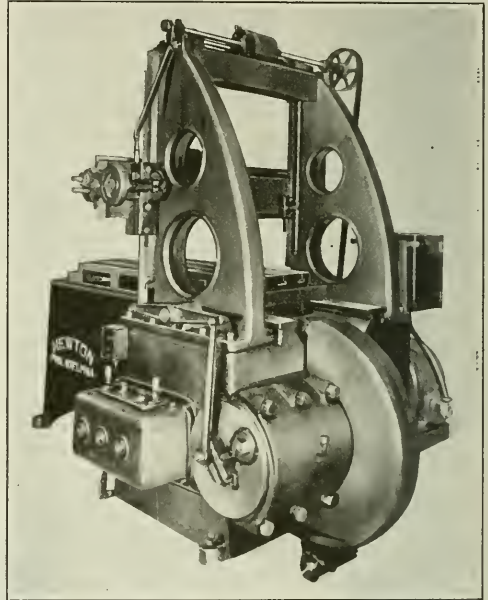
View of Newton Crank Planer showing the Compact Design of the Units on the Operating Side
